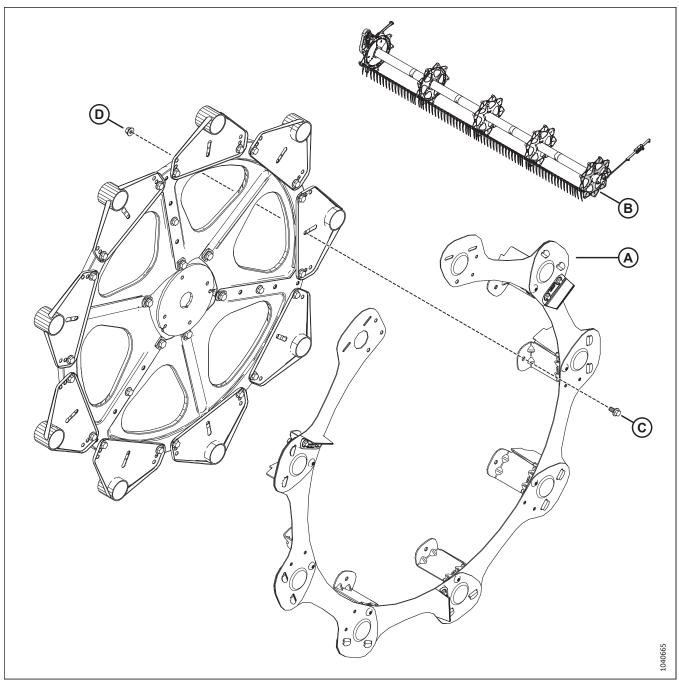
Nine-Bat Reel – Initial Endshield Assembly
